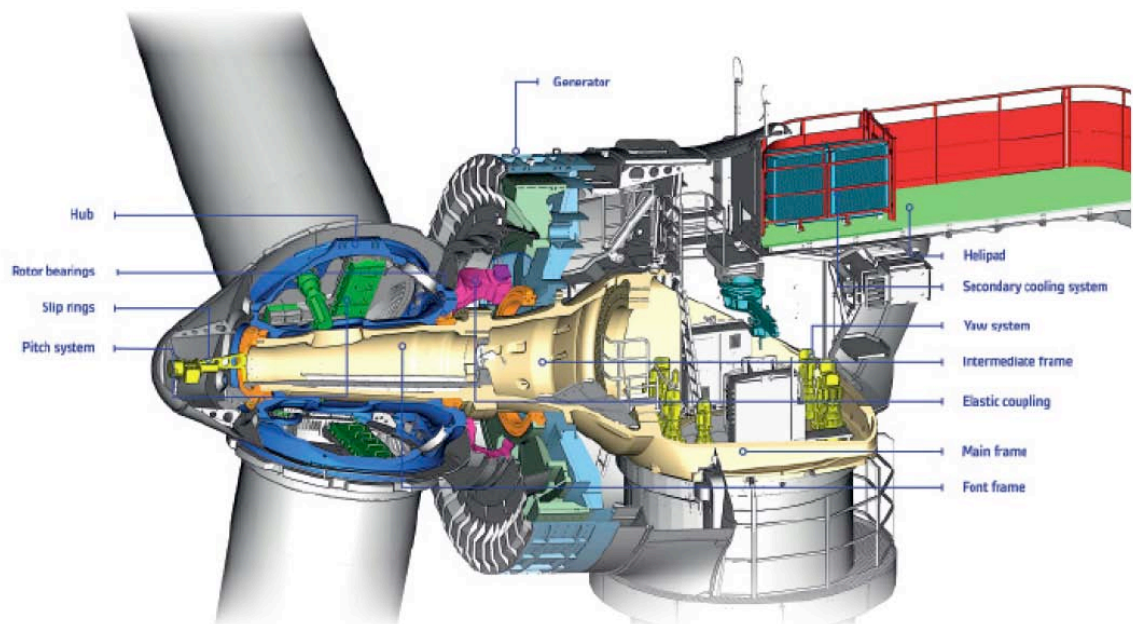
Side view cutaway drawing of the Alstom 6 MW 150 wind turbine.
